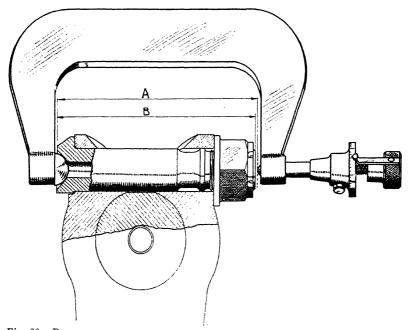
Diagram showing dimensions before and after tightening maneton bolt nut.
